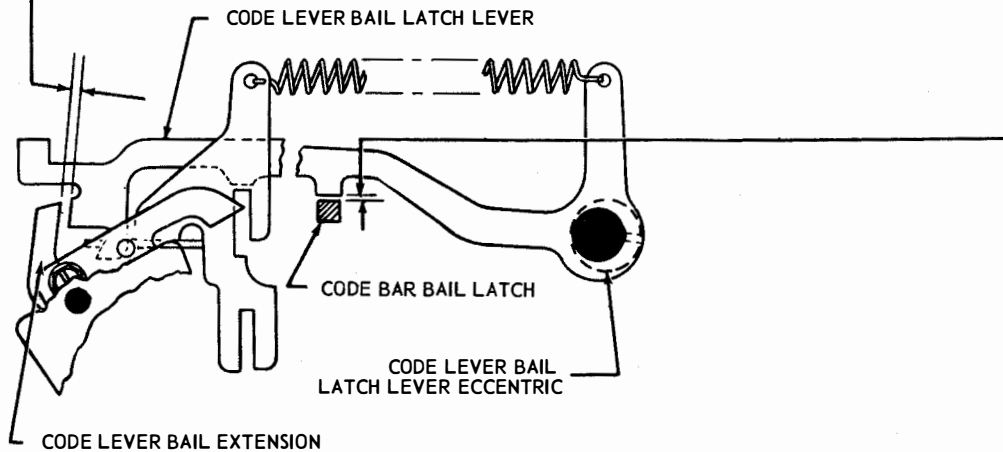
Keyboard, Code Lever Bail Latch Mechanism, Left Side View
